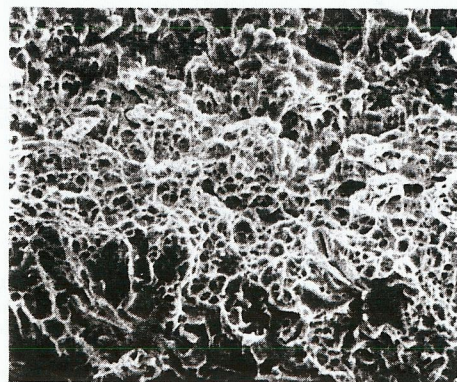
Weld Metal I -40°C. 1000x
